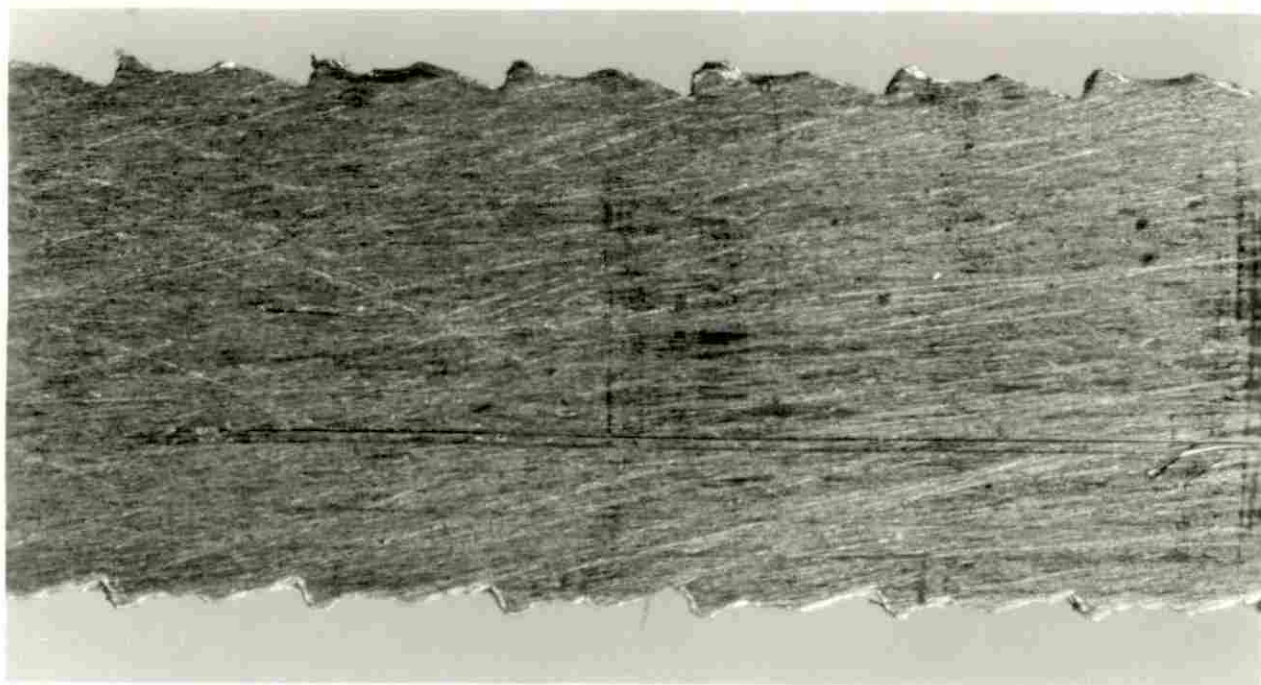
Longitudinal section of nail No. 2310 (x20d).
